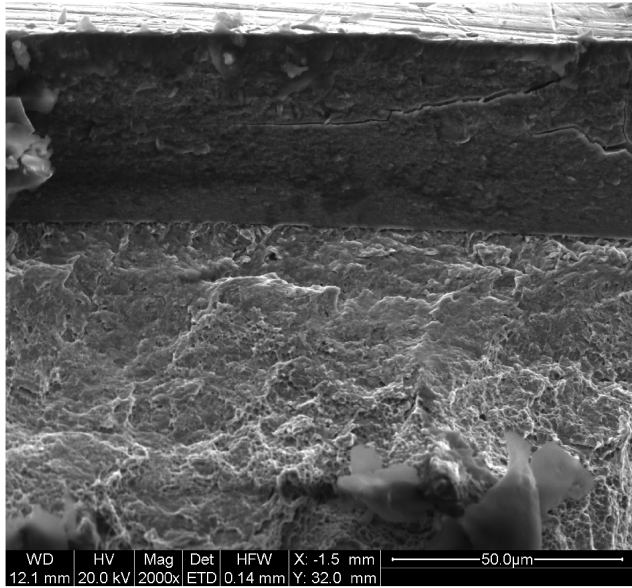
Morphology of intergranular fracture nearby coating of the bending sample.
